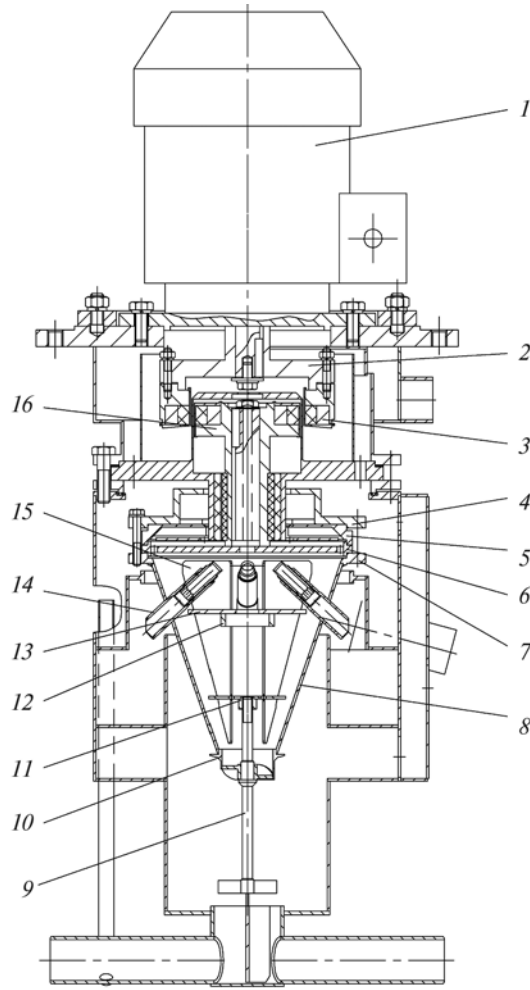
General appearance of extractor with external driving magnetic half coupling: 1) electric motor; 2) adapter; 3) driving magnetic half coupling; 4) column; 5) cover; 6) disk; 7) flange of housing; 8) conical lining; 9) shaft; 10) lower bushing; 11, 12) bushings; 13) partition; 14) tubes; 15) blades; 16) driven magnetic half coupling.
